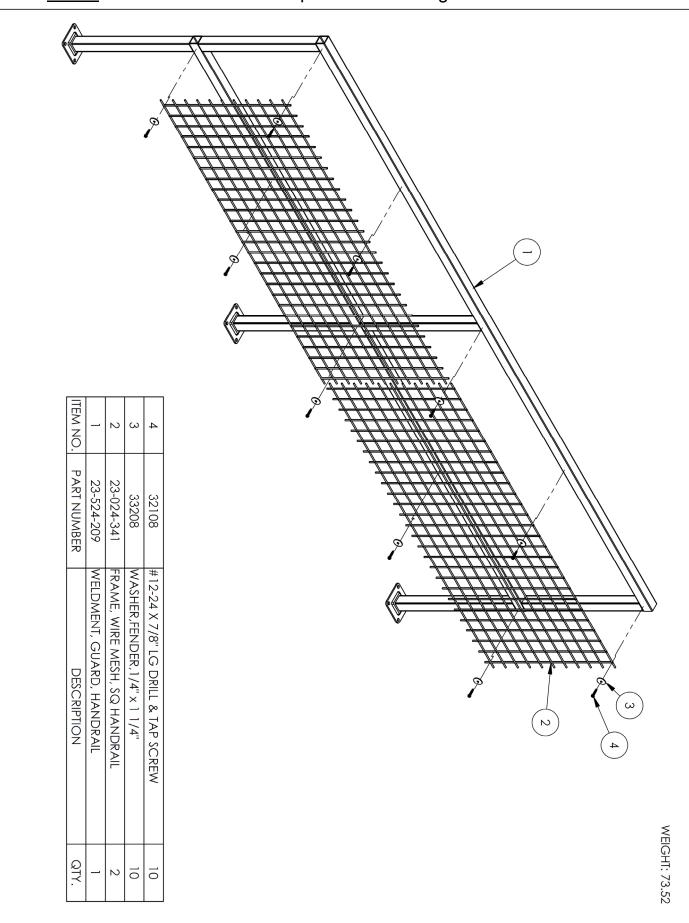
SQ-120-W/WM-120 Exploded Parts Diagram and Bill of Materials
